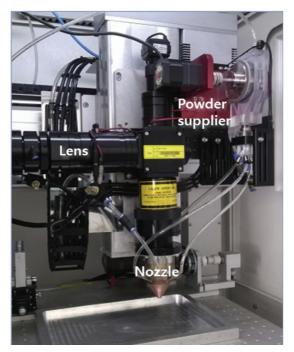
Apparatus of the 3D laser coating equipment for cladding coating
